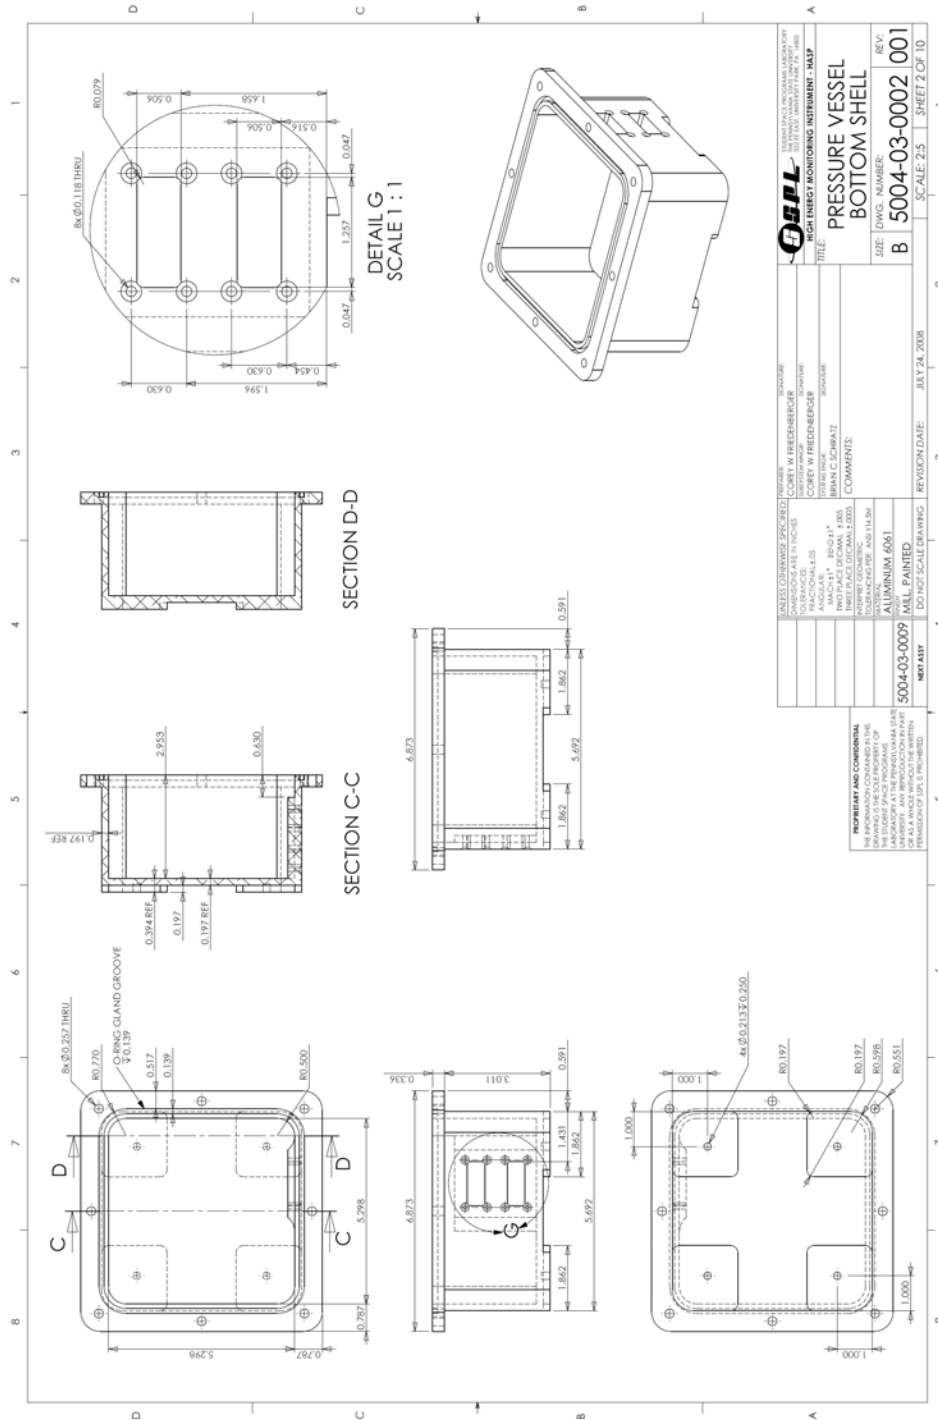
Mechanical Drawing: Pressure Vessel Bottom Shell
